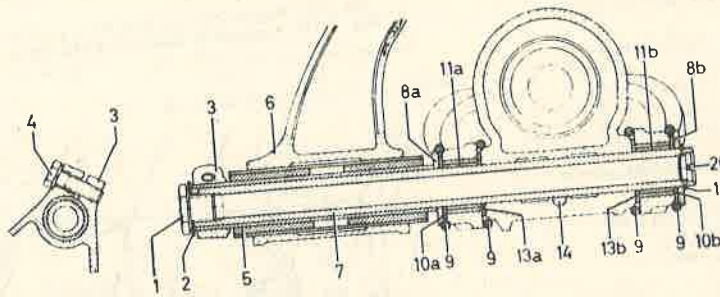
Sectional view of rear axle suspension carrier pivot (Sec. 10)
